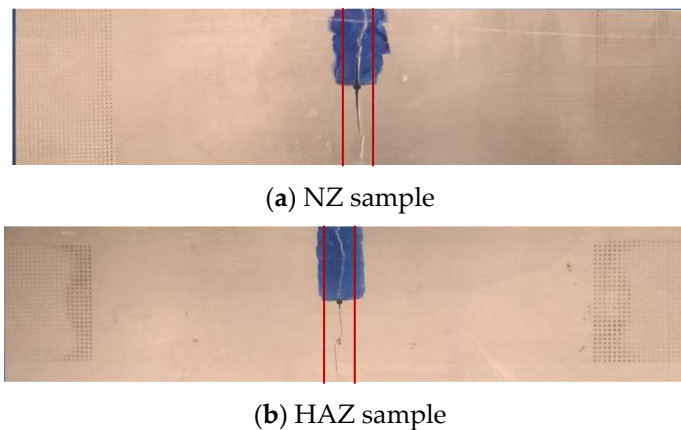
Multi-region crack propagation path of SMA490BW welded joint (Inside the red line is the weld area).
